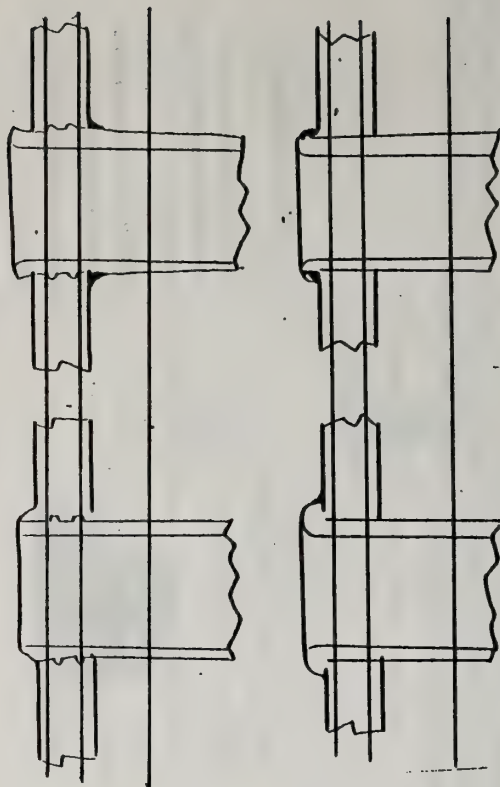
TYPICAL-EXAMPLES-OF-SEAL-WELDING-TUBES
